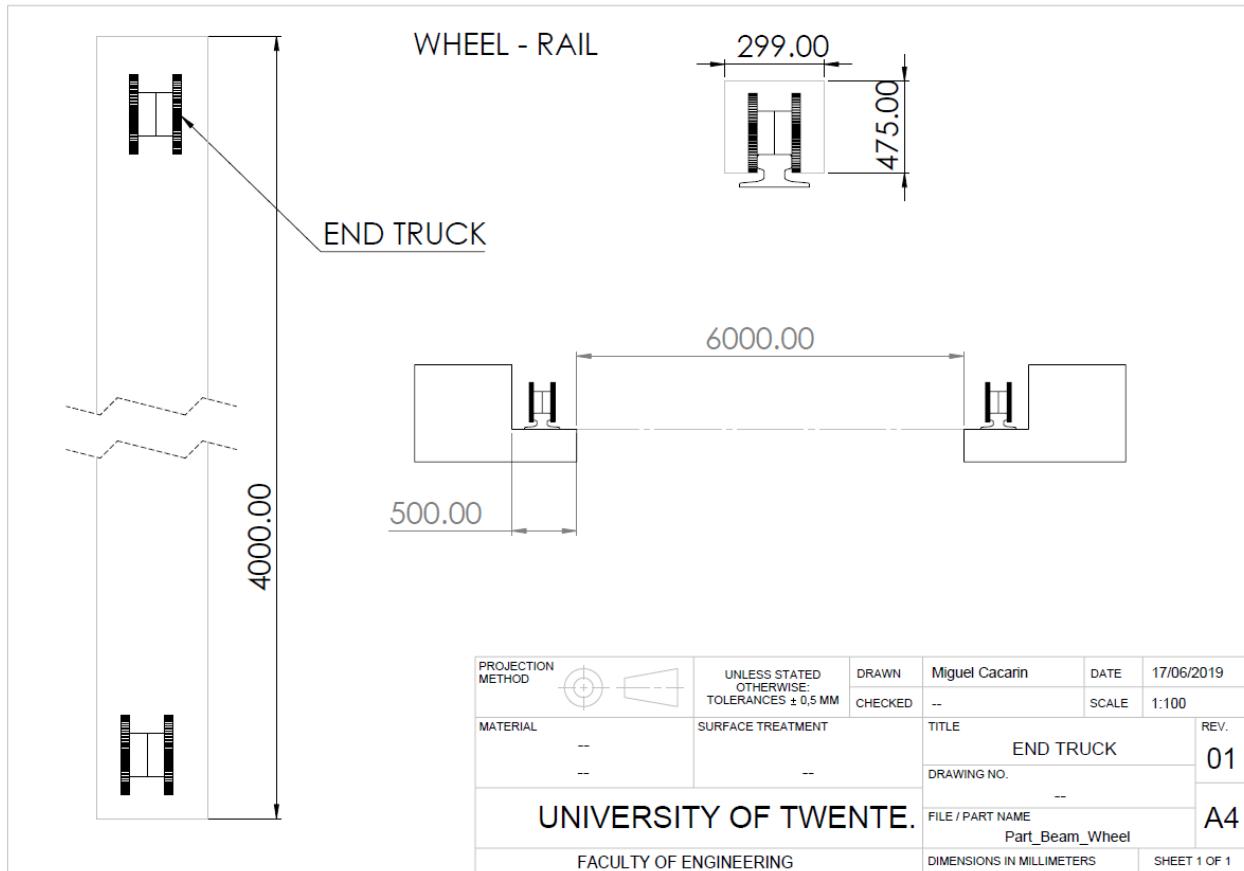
Sketch with the dimensions of one truck, top and front view and sketch with the current dimensions and placement of the trolley in between the girders.
